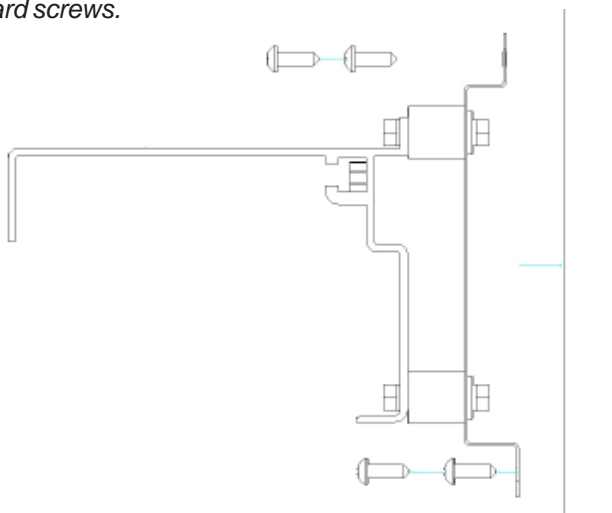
Locking the heater in place with two M8 star base plates and M8 x 120 locking bolts.
